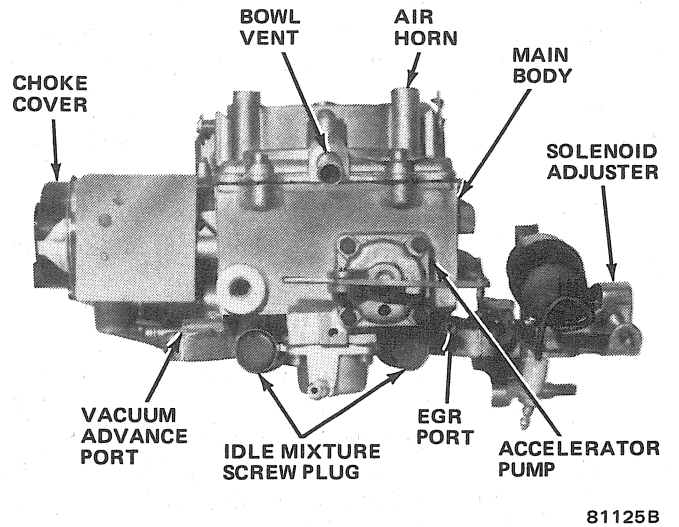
A-10 Motorcraft Model 2150 Carburetor
